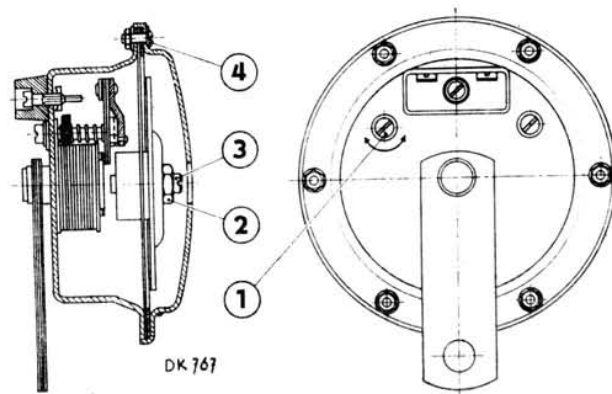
/1 - Sectional View of Horn and a View of Rear Adjusting Screw
